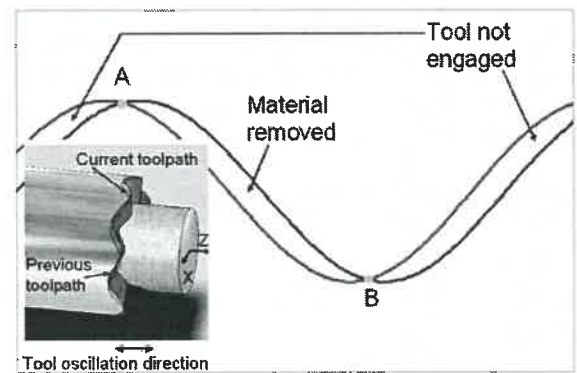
Exaggerated view of a cylindrical workpiece cut face showing the waves created by the tool-path oscillation.
